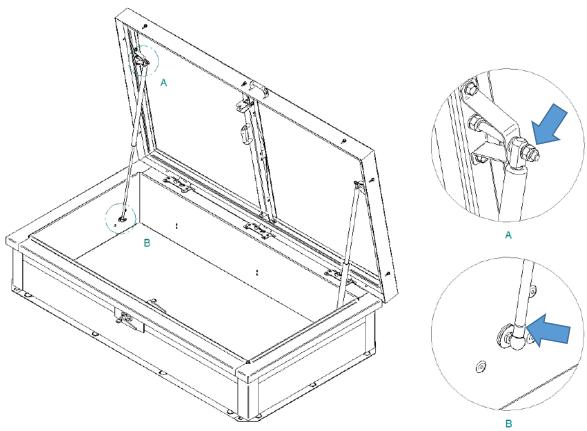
Reversing the gas springs. A – M8 nut. B – ball-and-socket joint mount.
